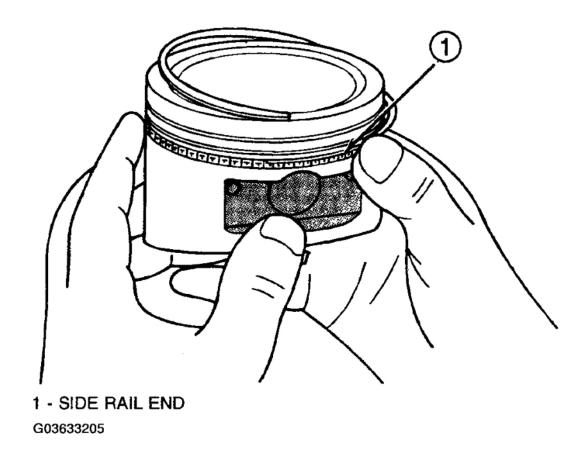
Identifying Piston Ring Courtesy of DAIMLERCHRYSLER CORP.
